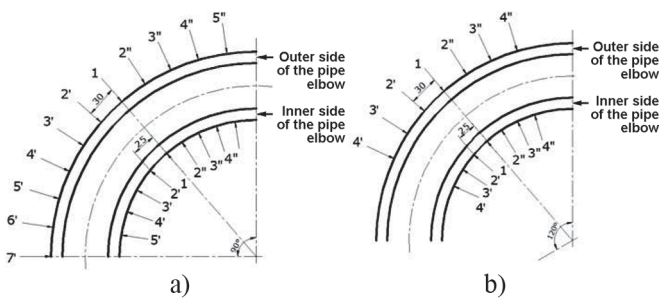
Measurement locations on pipe elbows: a) new pipe elbow 219/90 - 305 mm; b) used pipe elbow 219/90 - 305 mm
